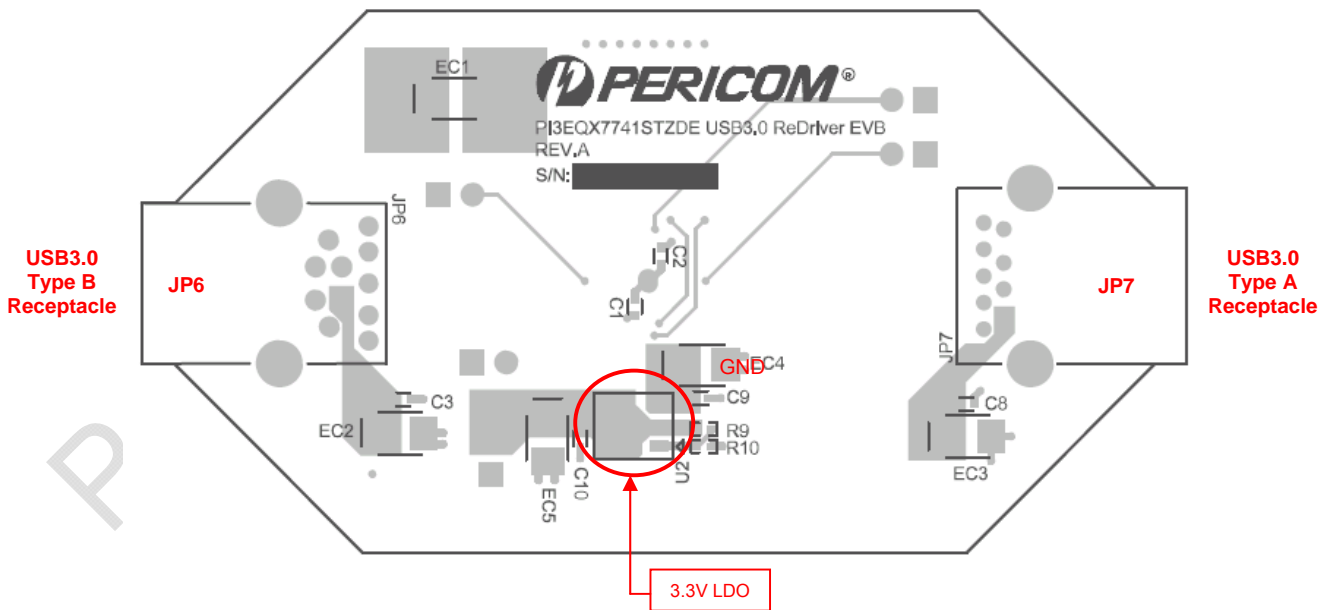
, Bottom view of PI3EQX7741ST EVB Layout
